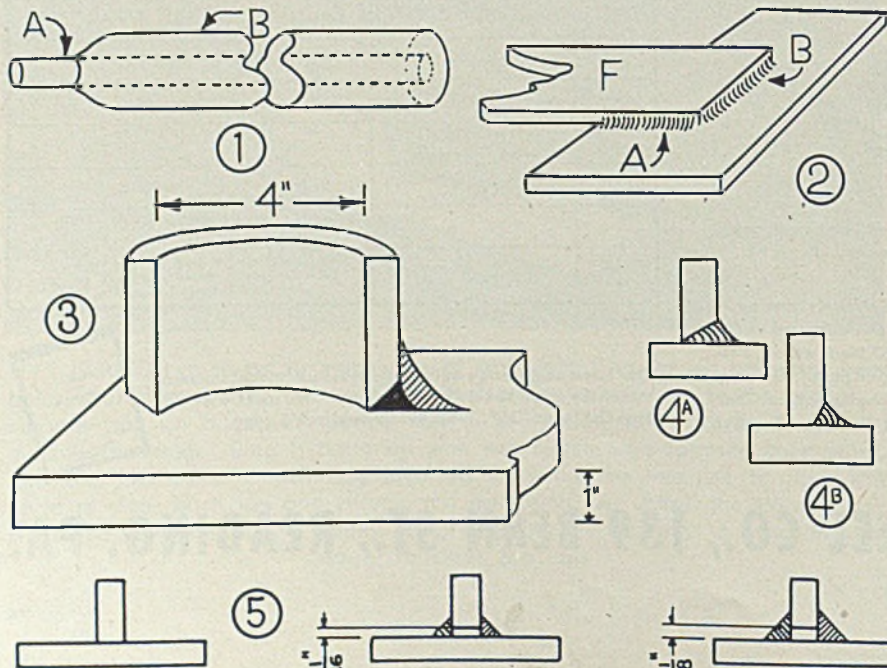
Portion of typical arc welding electrode. A is metal rod; B is heavy extruded coating. Section at A is bare to allow contact with electrode holder
